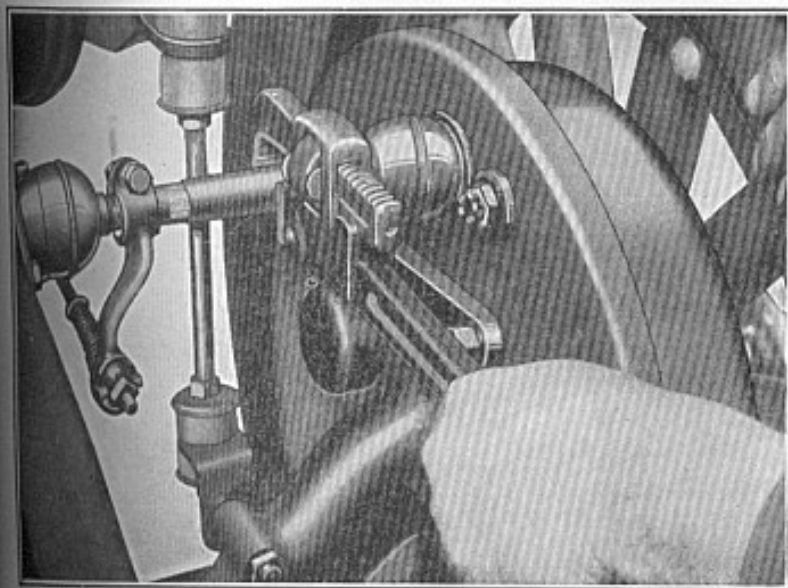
Applying front brake with pipe wrench for resetting cam operating lever. Note lever is off serrations
